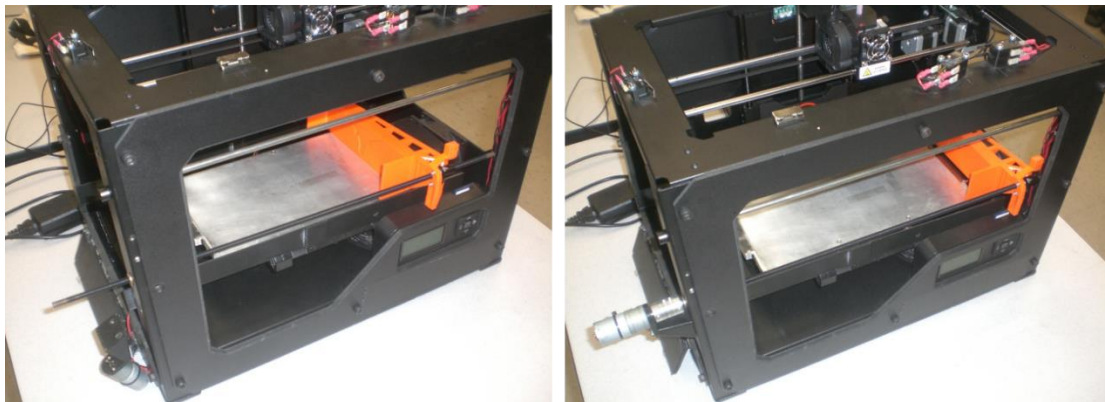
Left picture shows the lead screw installed into the bushings. Right picture shows the lead screw in final position, fastened to motor coupling.
